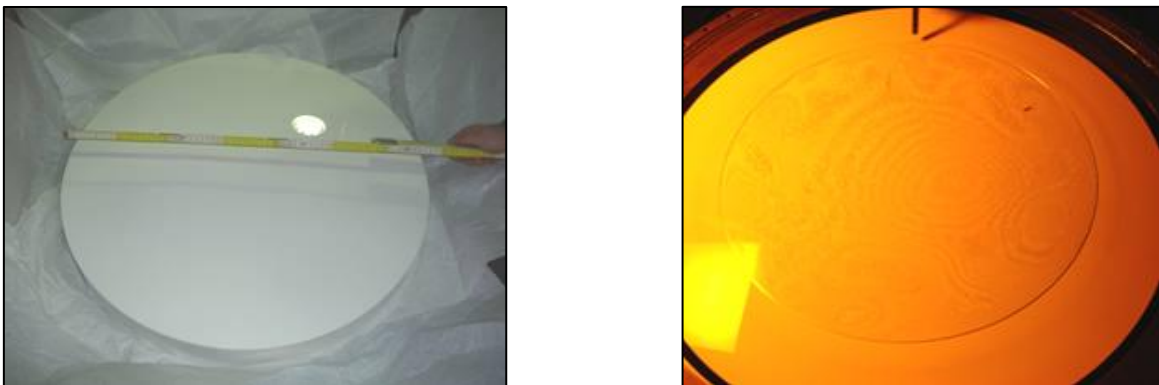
(left) 700 mm ZERODUR K20 mould used for scaling-up the slumping process. (right) 500 mm diam. Borofloat™ 33 glass segment after a slumping cycle and till placed on the mould.
